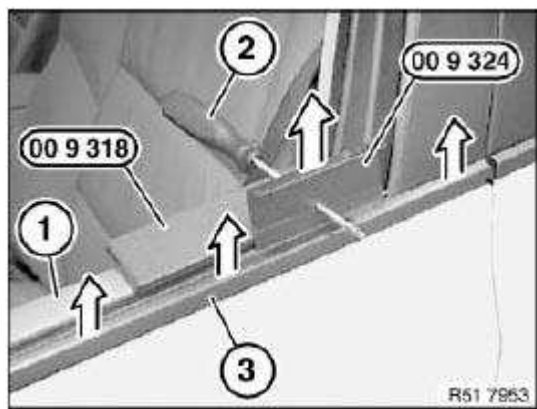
Special Tool (00 9 318) And (00 9 324)
